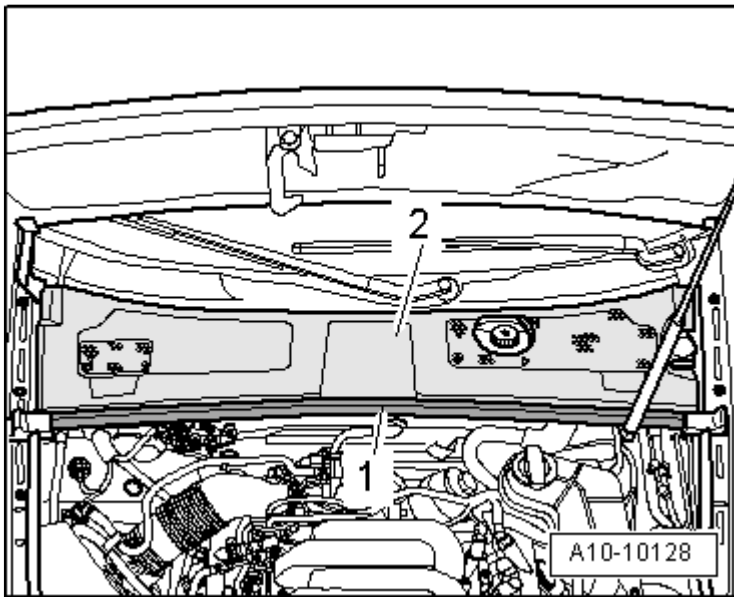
Removing Rubber Seal For Plenum Chamber Cover & Plenum Chamber Cover
